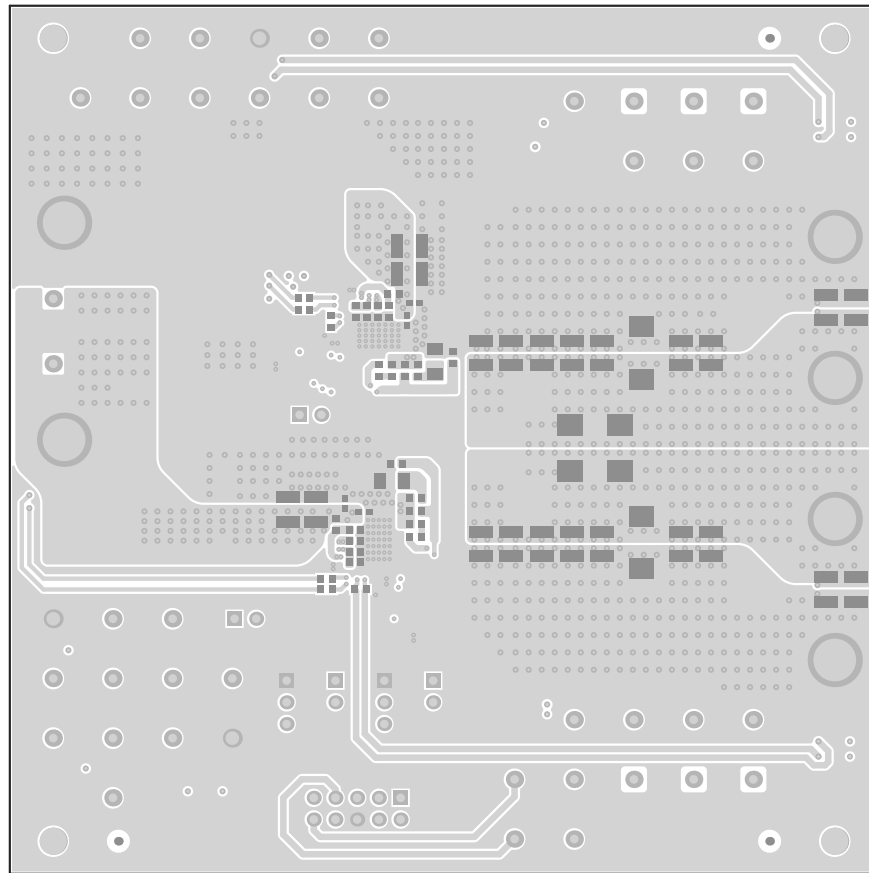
TPS546C23EVM2-746 EVM Bottom Copper (Top View)
